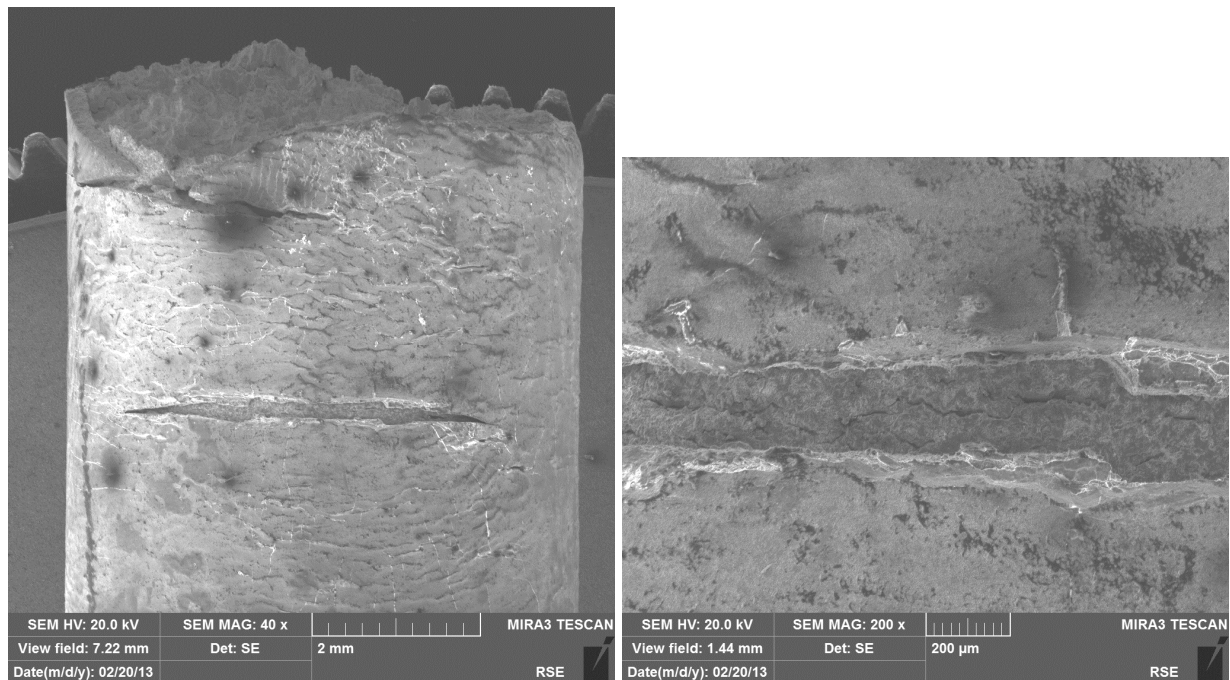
Secondary crack developed on gauge length surface close to fracture in specimen R262-1
